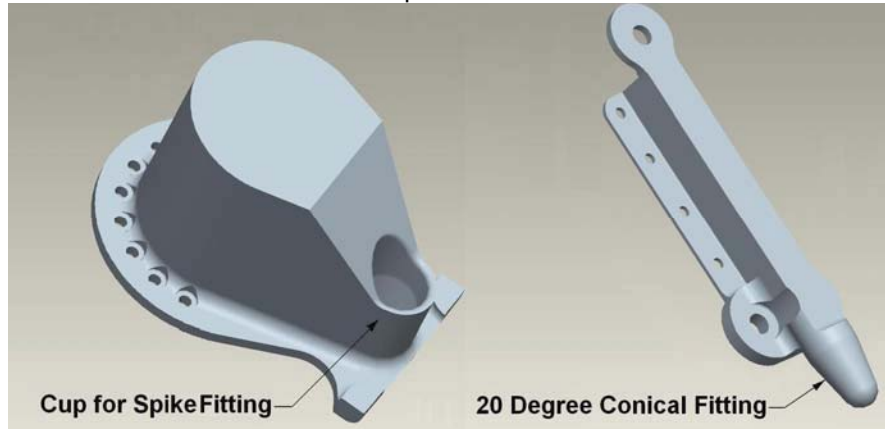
Strut Fitting Aft Skirt Mounted Spike Fitting
